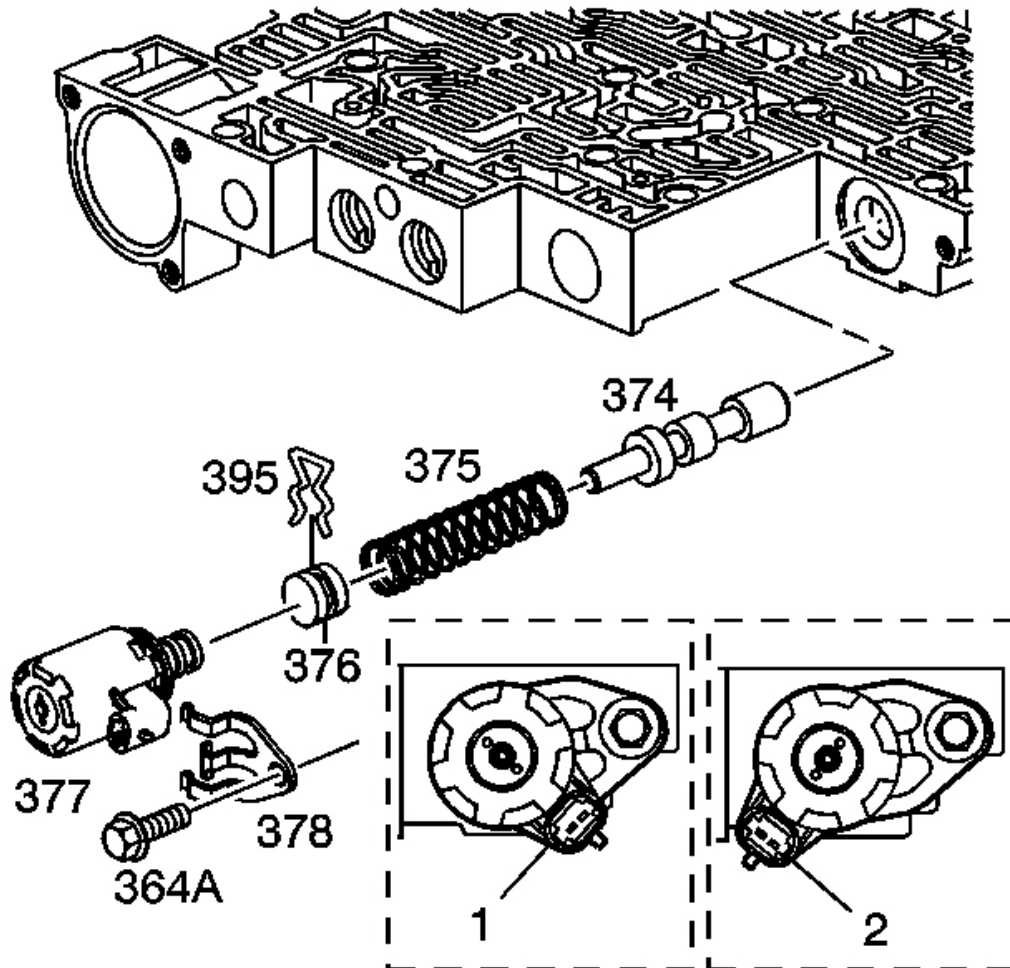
Locating Actuator Feed Limit Valve & Pressure Control Solenoid
